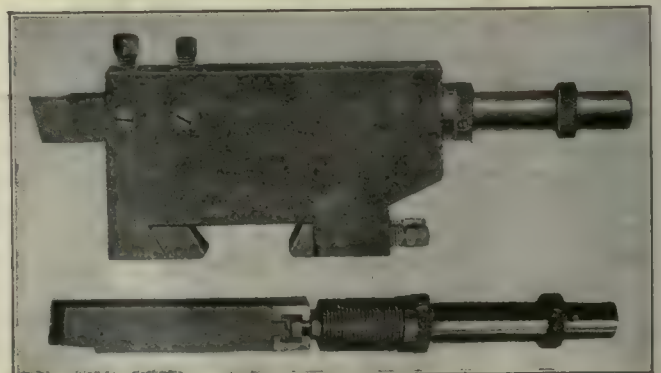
DETAIL OF THE METHOD OF TOOL HOLDING, TOOL CLAMPING AND TOOL FEEDING
